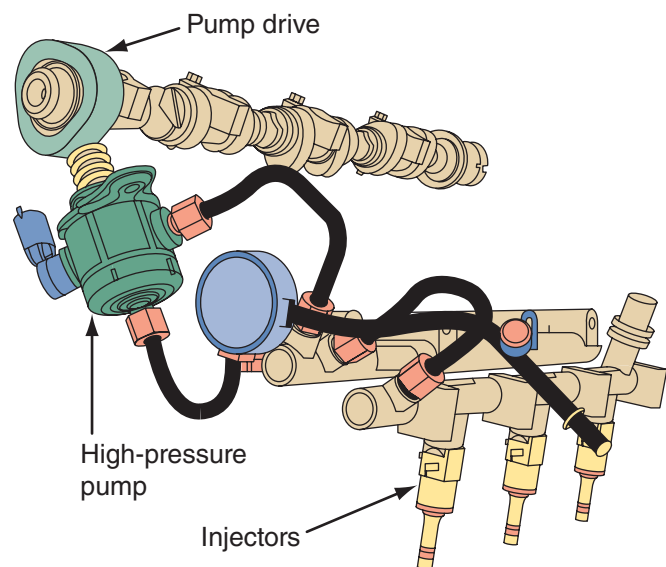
The high-pressure fuel pump for a GDI system is driven by a camshaft.
